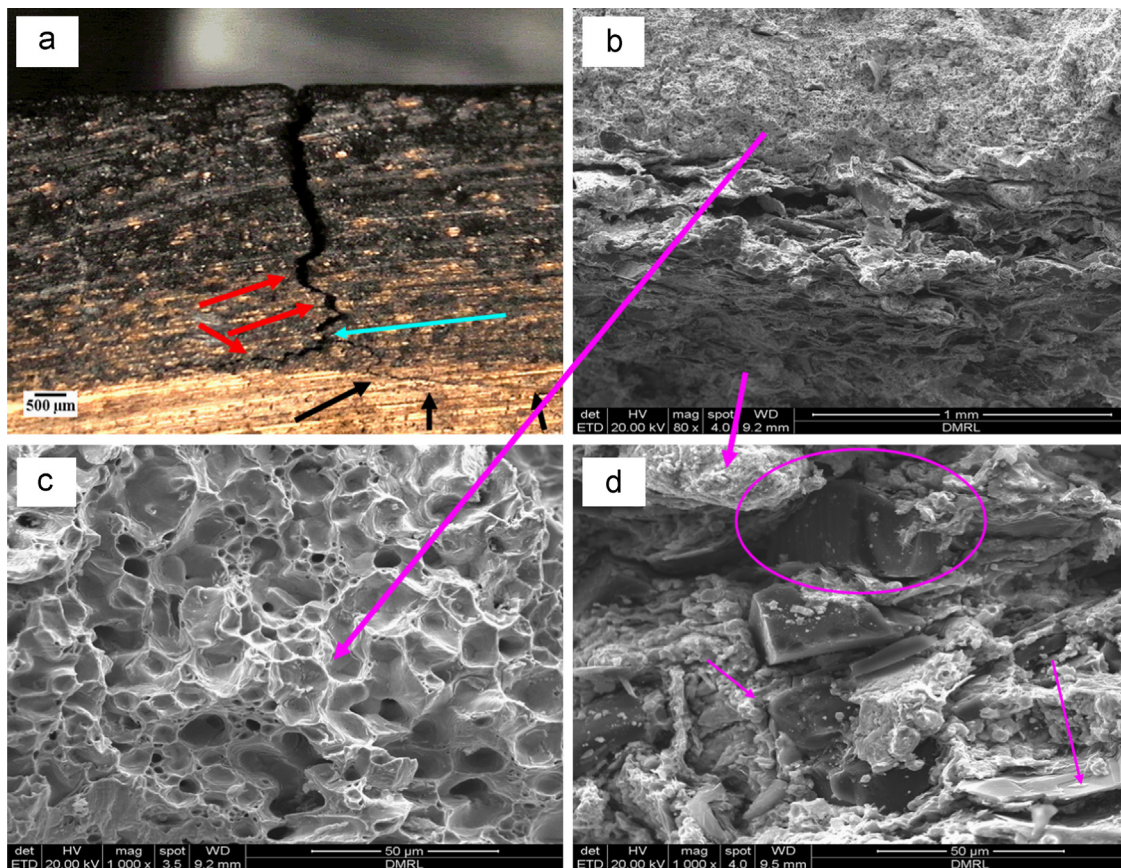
Fractographs of the flexural tested CLS composite. (a) Macro-view of the cross section shows crack arresting and branching at the Cu/composite layer, crack tip blunting in the Cu layer, (b) sectional view of the fracture surface, (c) pure ductile failure of Cu layer showing elliptical dimples, and (d) quasi-cleavage intergranular fracture of the composite layer showing cleavage facets and cracks around the particles with no evidence of particle cracking.
